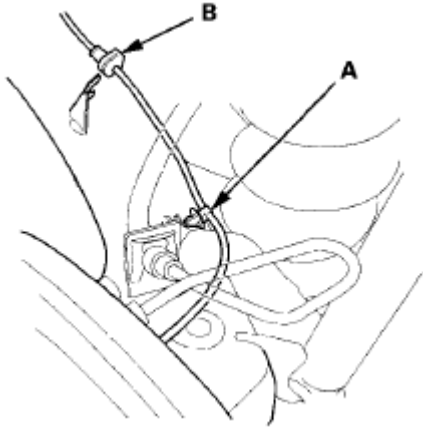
Identifying Wheel Speed Sensor Clip And Wire Guide Rubber
